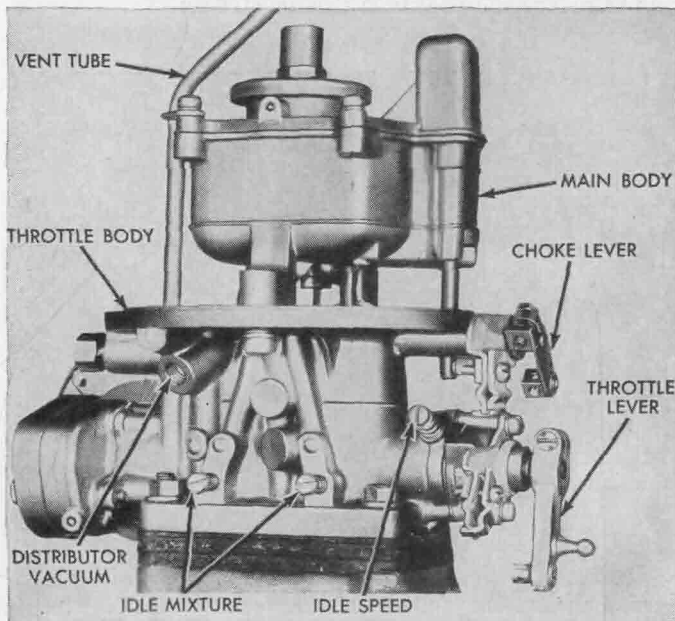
Carburetor used on late-model Ford V-8 engines. (Ford Motor Company)
